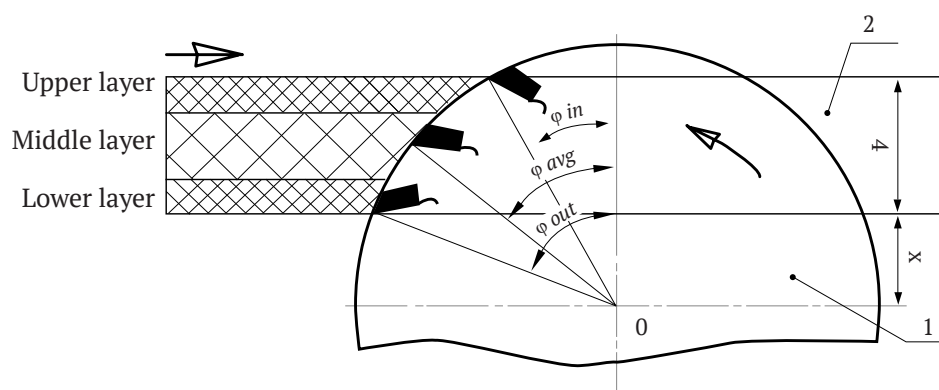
Particle board cutting scheme: 1 – saw; 2 – board
